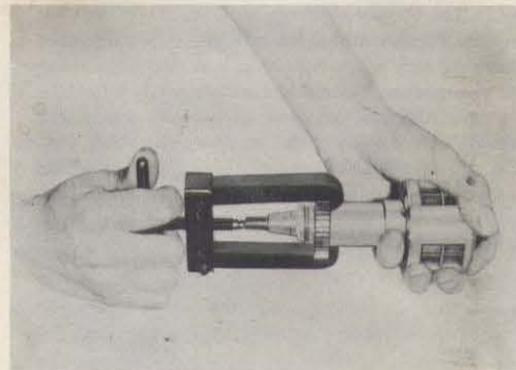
Removing Small Distributor Gear With No. 11-1037 Puller
